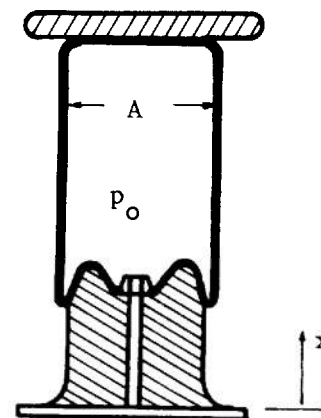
Pneumatic Spring (Ref. 63).
